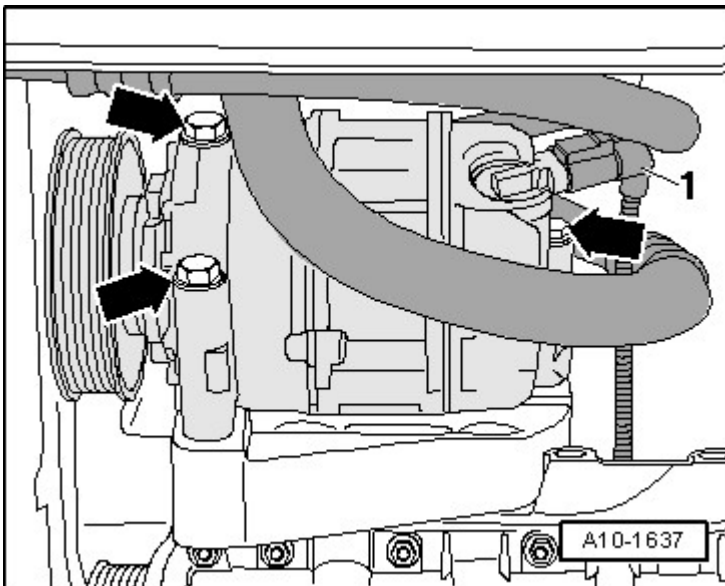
Identifying A/C Compressor Bolts And Solenoid Clutch Electrical Connector
